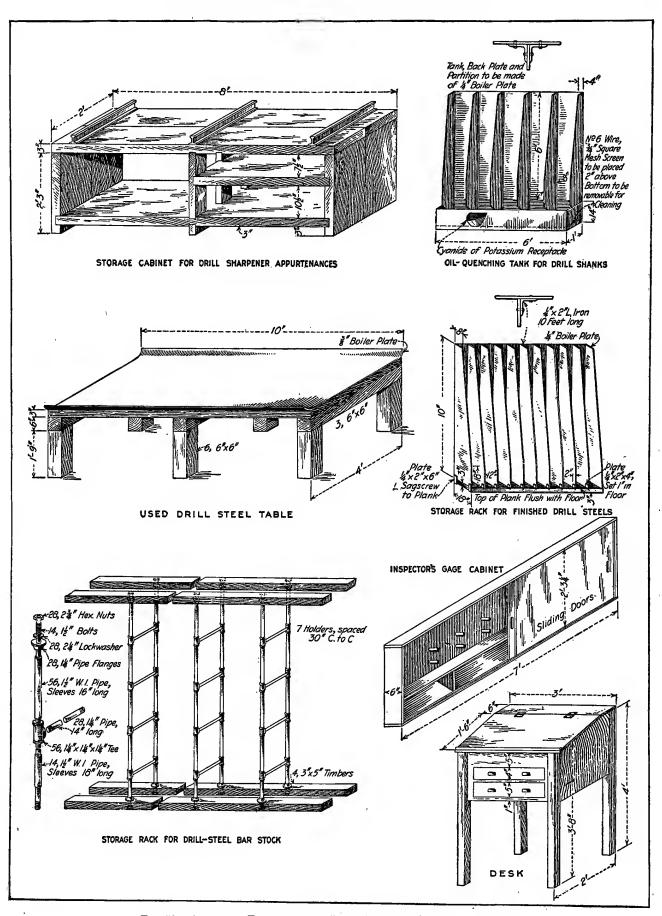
ACCESSORY EQUIPMENT FOR IDEAL SHOP FOR SHARPENING STEEL
